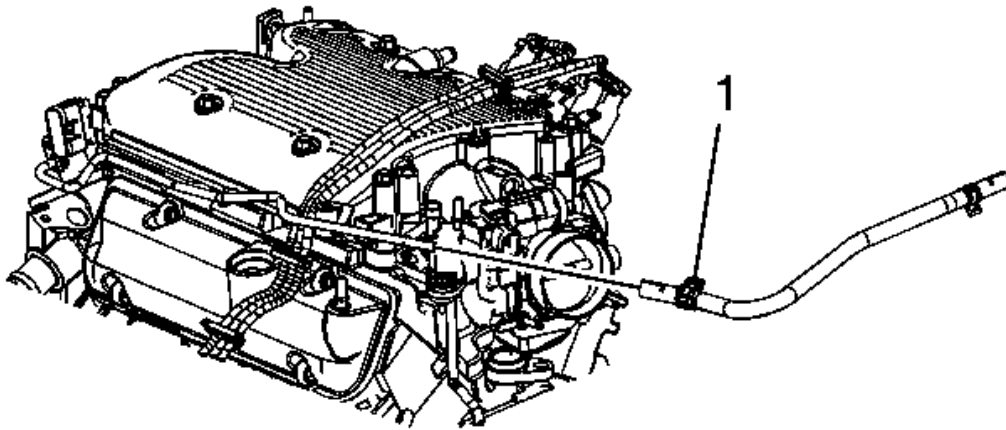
Locating Radiator Surge Tank Inlet Hose Clamp
